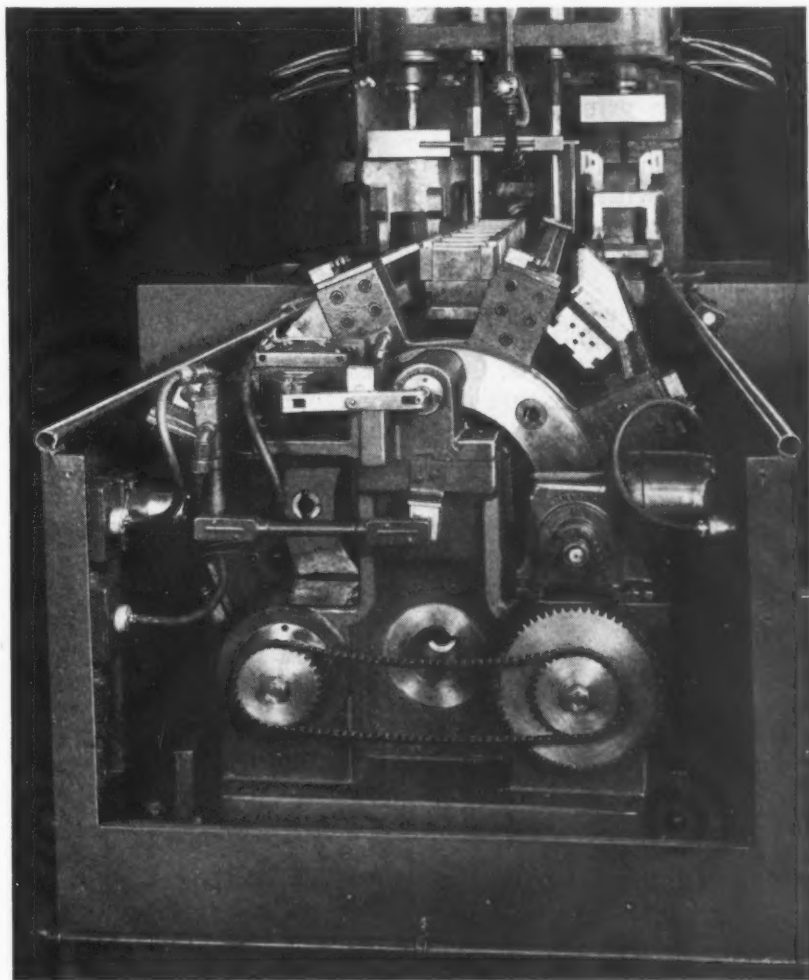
Close-up View of the Broaching Machine Illustrated in Fig. 8, Showing Turret-operating Mechanism for the Broaches
